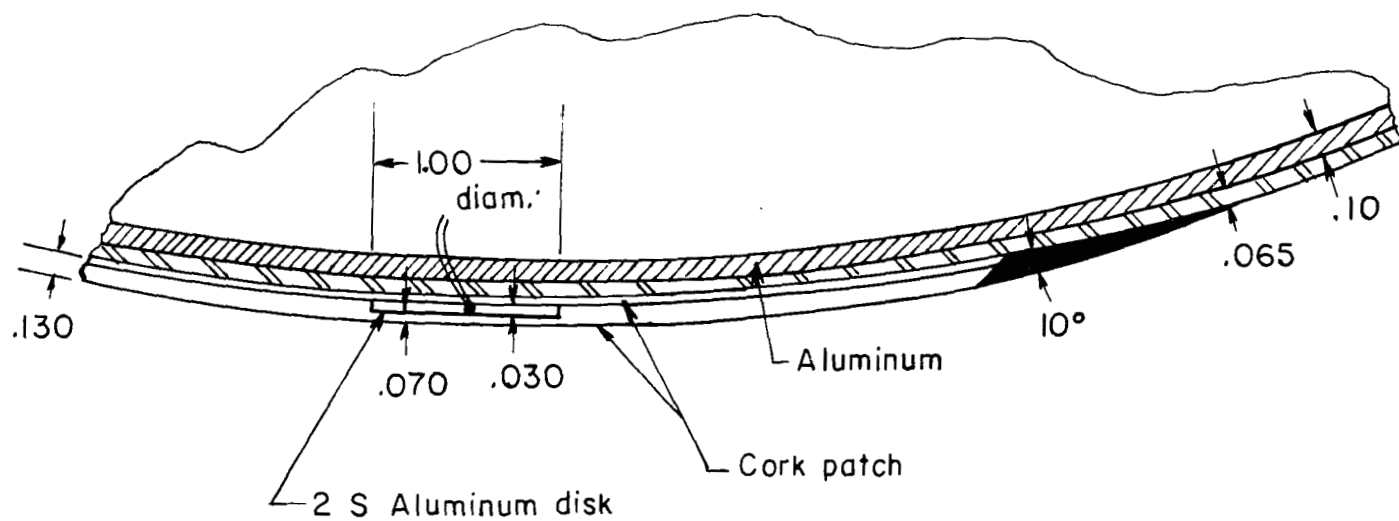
Cross section of cork patch showing thermocouple assembly on RAM B1.
